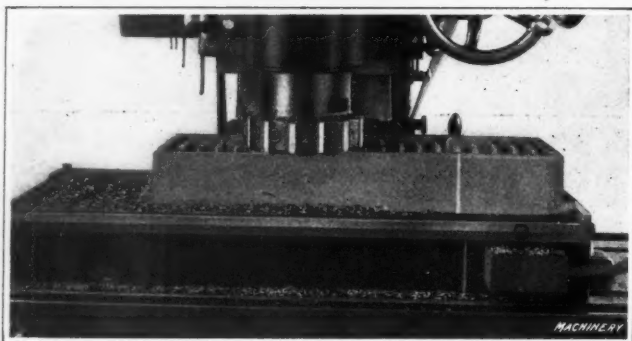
Magnetic Chuck used for holding Work for End-milling
